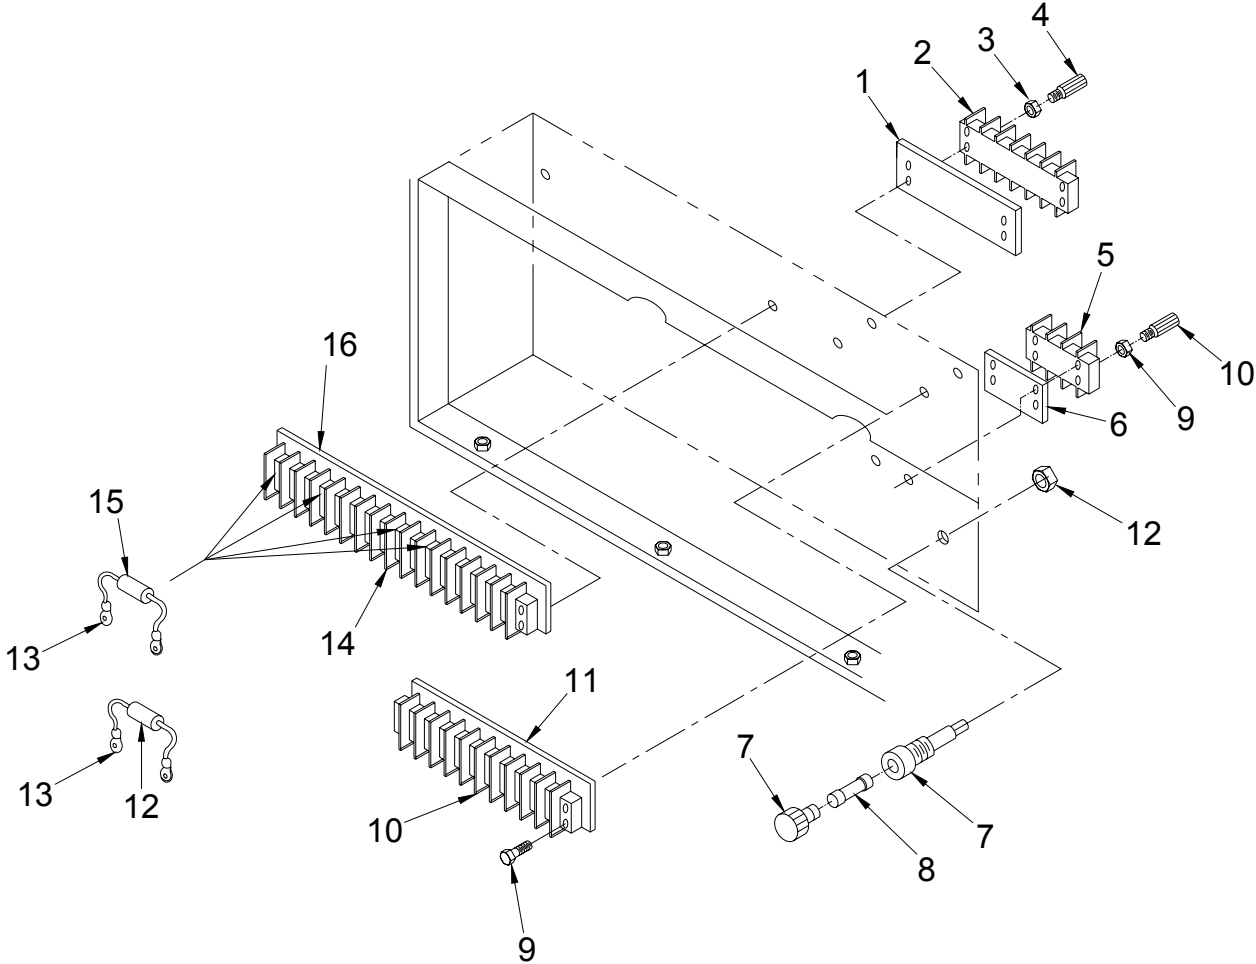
CONTROL BOX ASSEMBLY/CONTROL PANEL ASSEMBLY, 60 HZ (SHEET 1 OF 2)
